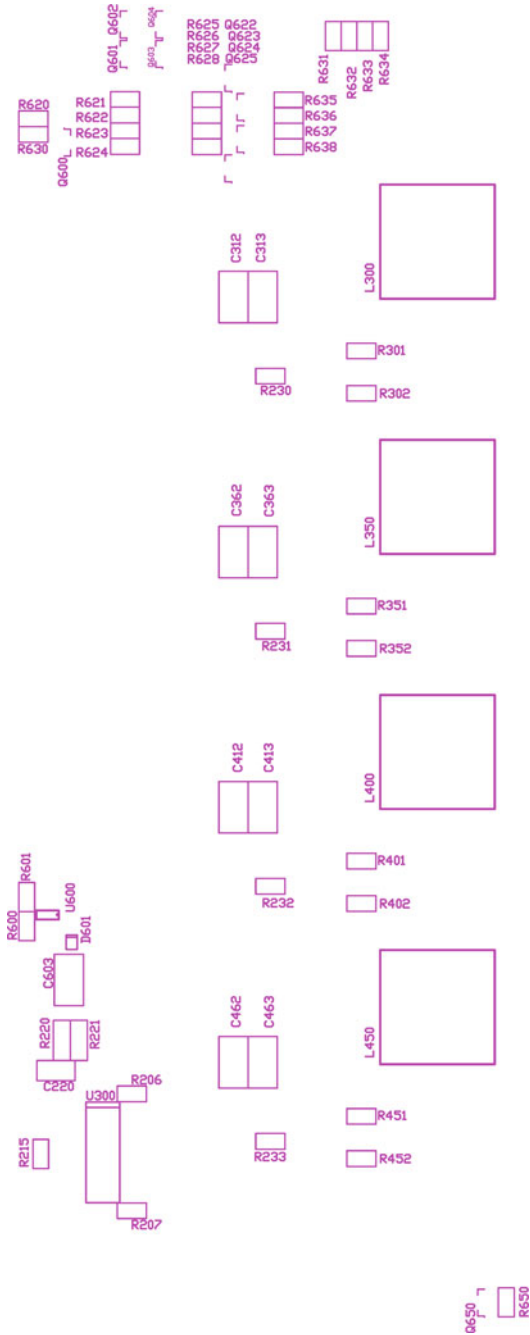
PCB design of bottom layer corresponding to the test board of Fig. G.12
